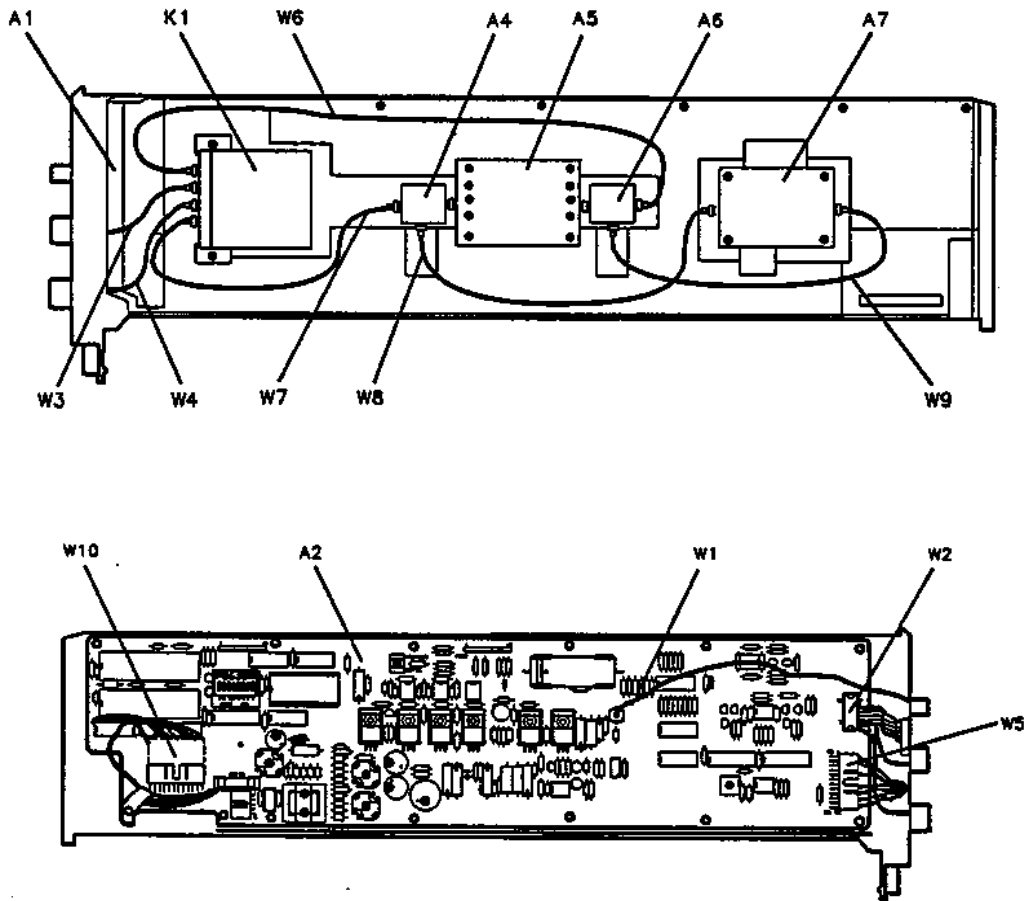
HP 70620B Major Assembly and Cable Locations
